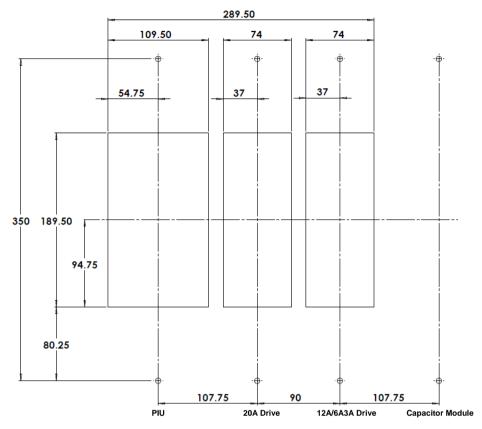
PIU, 20A and 12A/6A/3A drives heatsink cut-outs and Capacitor Module hole mounting hole positions in an array Duct mount
